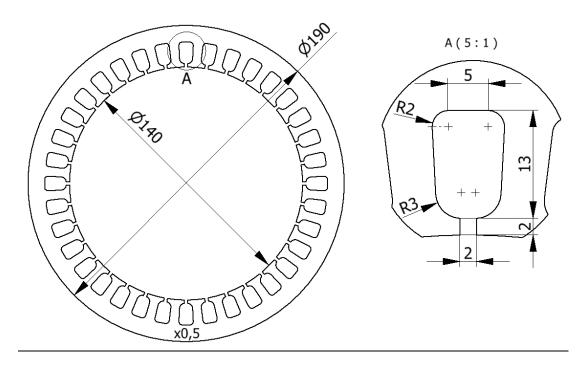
Main Motor Stator Sheet & Stator Slot Dimensions
